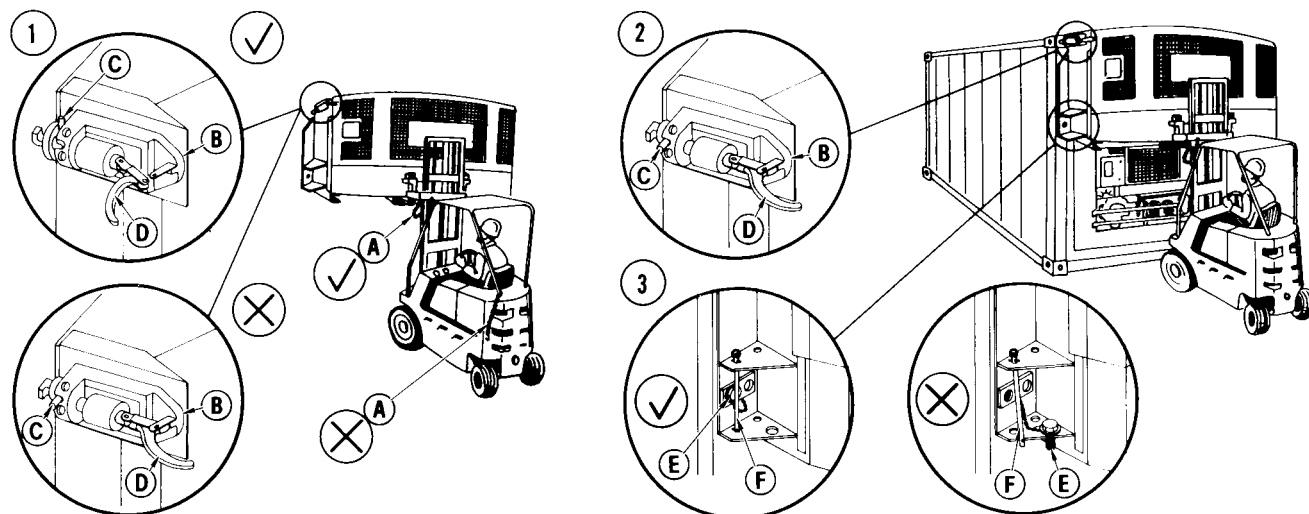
Clamp-on Mounting – 69GC15-104, -134, -174
